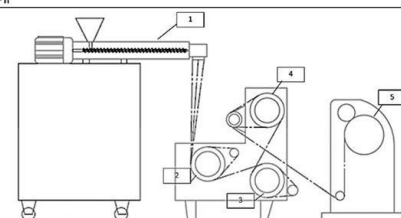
Fiber melt spinning system: (1) Extruder, (2) 1st Hot roller unit, (3) 2nd Hot roller unit, (4) 3rd roller unit, and (5) winding unit
